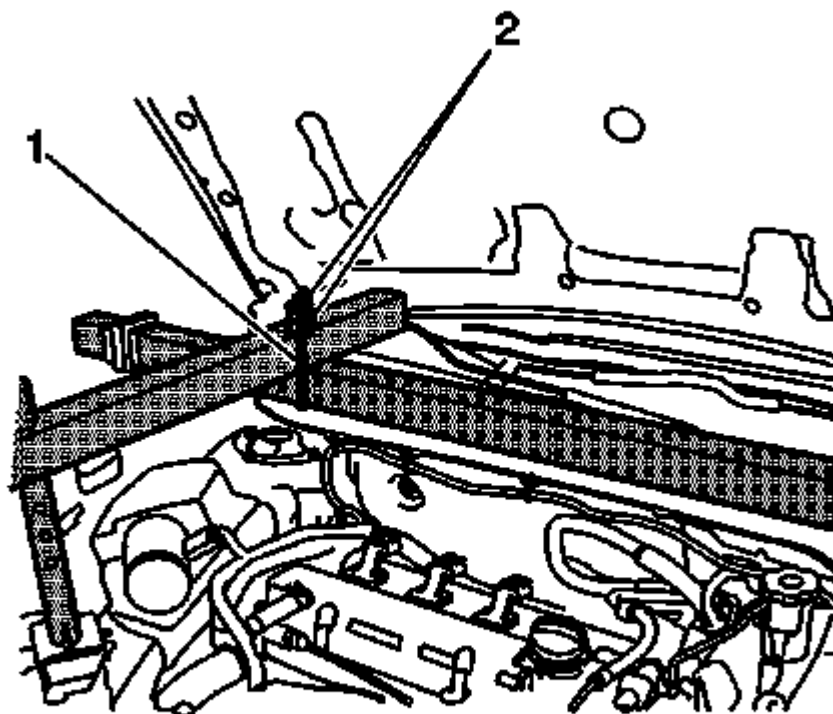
View Of Engine Support Fixture & Cross Bracket
